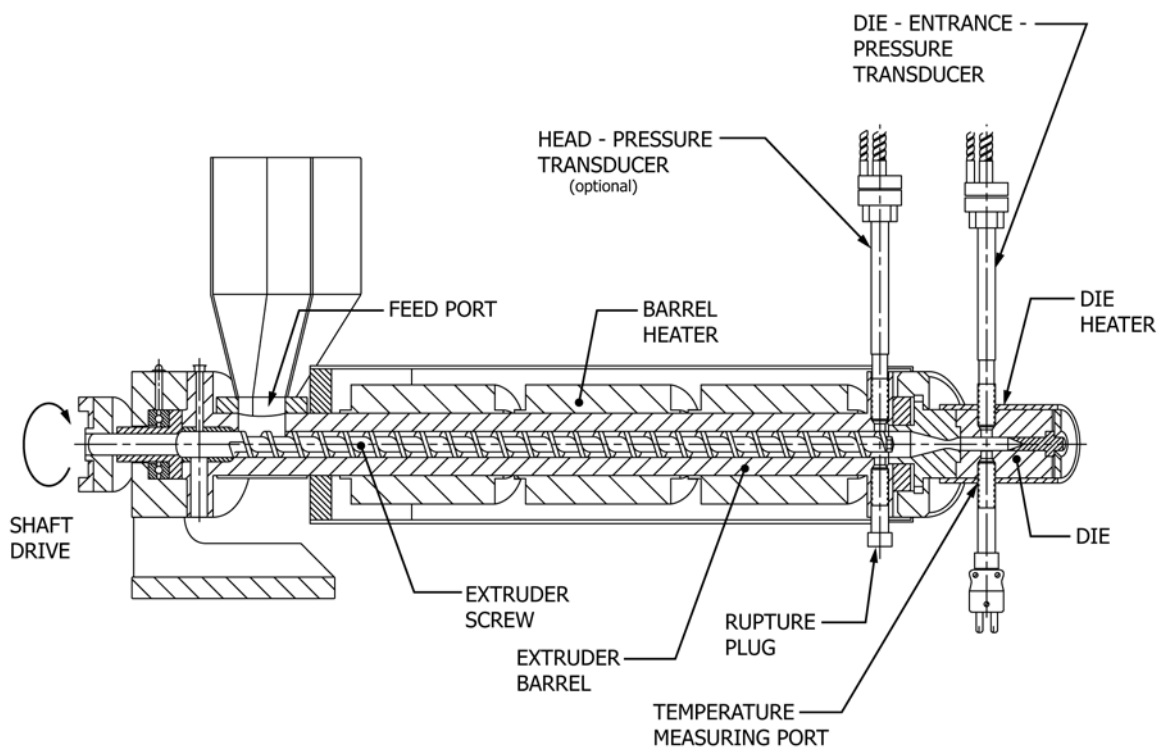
Schematic of Screw-Extrusion-Type Rheometer Cross-Section
